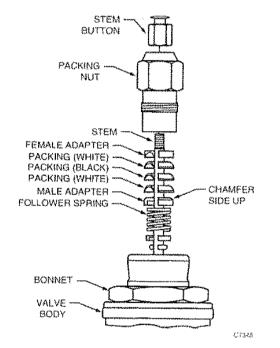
Valve with Chevron Packing and 3/8 Inch Stem.
